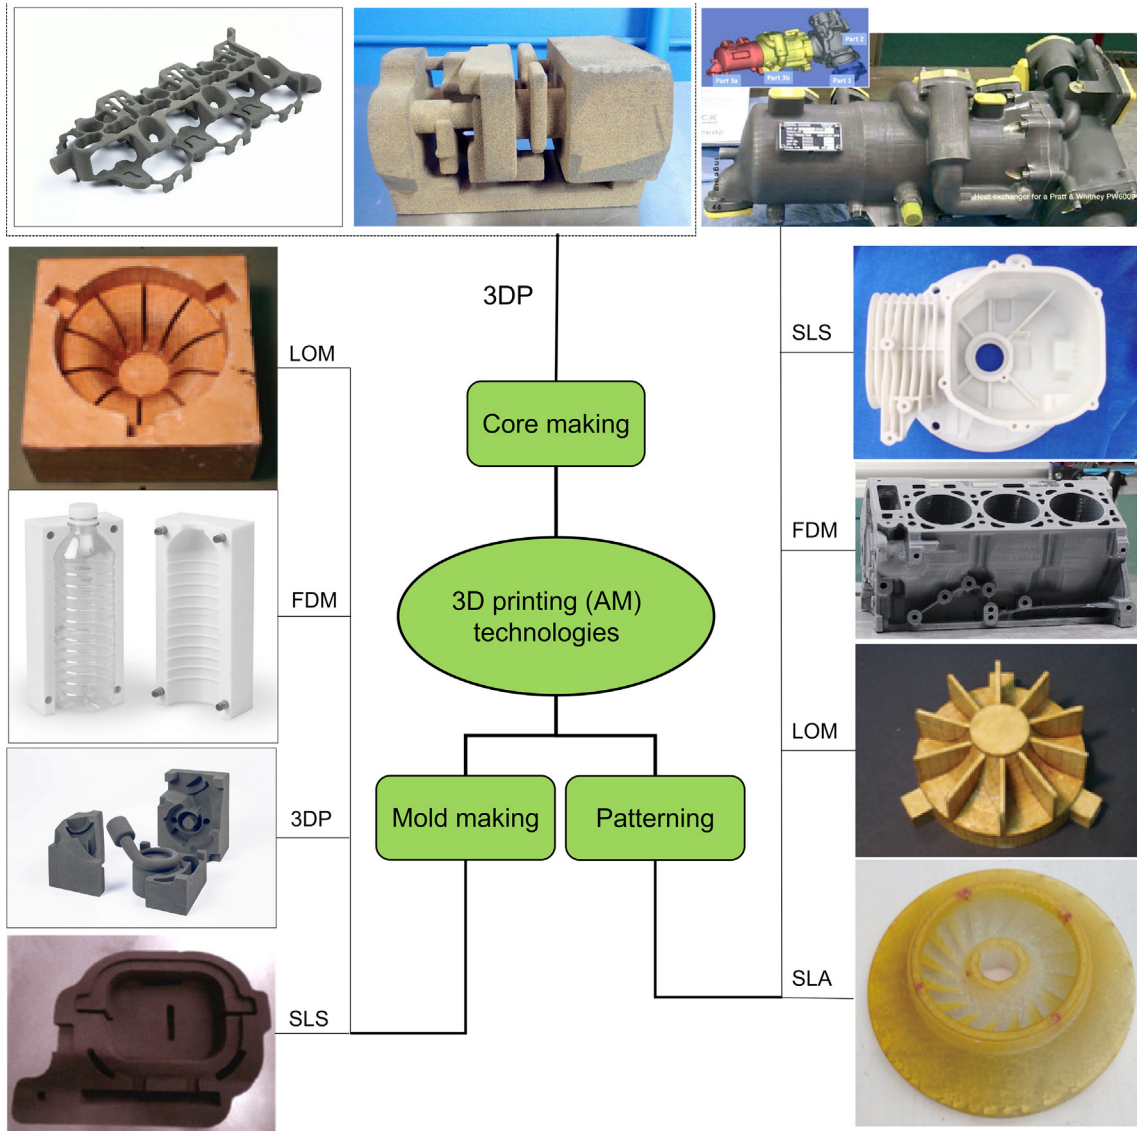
Applications of 3D printing technologies in casting [18-27]
